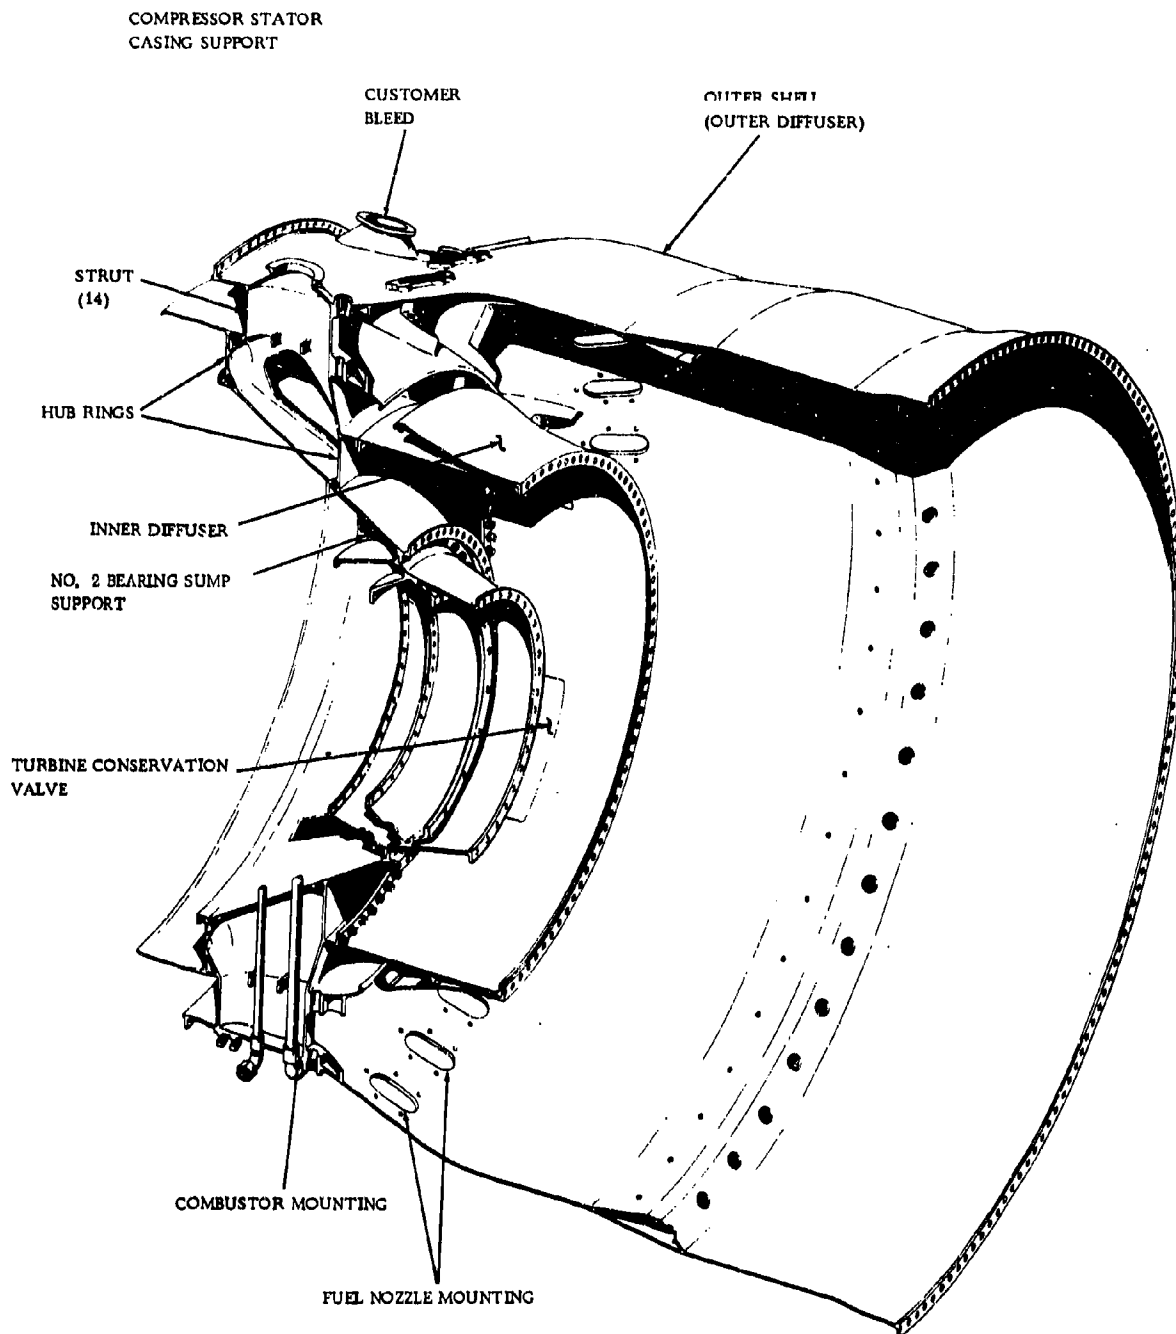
COMPRESSOR REAR FRAME ASSEMBLY
